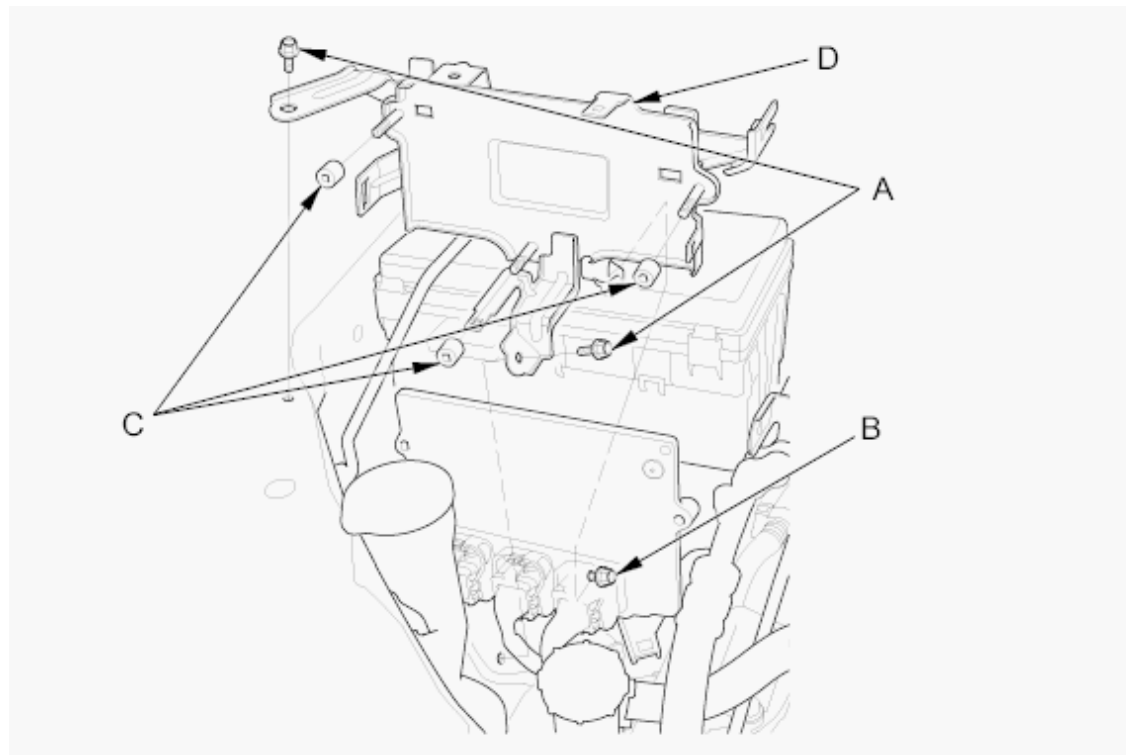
Identifying PCM Bracket With Bolts (Continental PCM)
